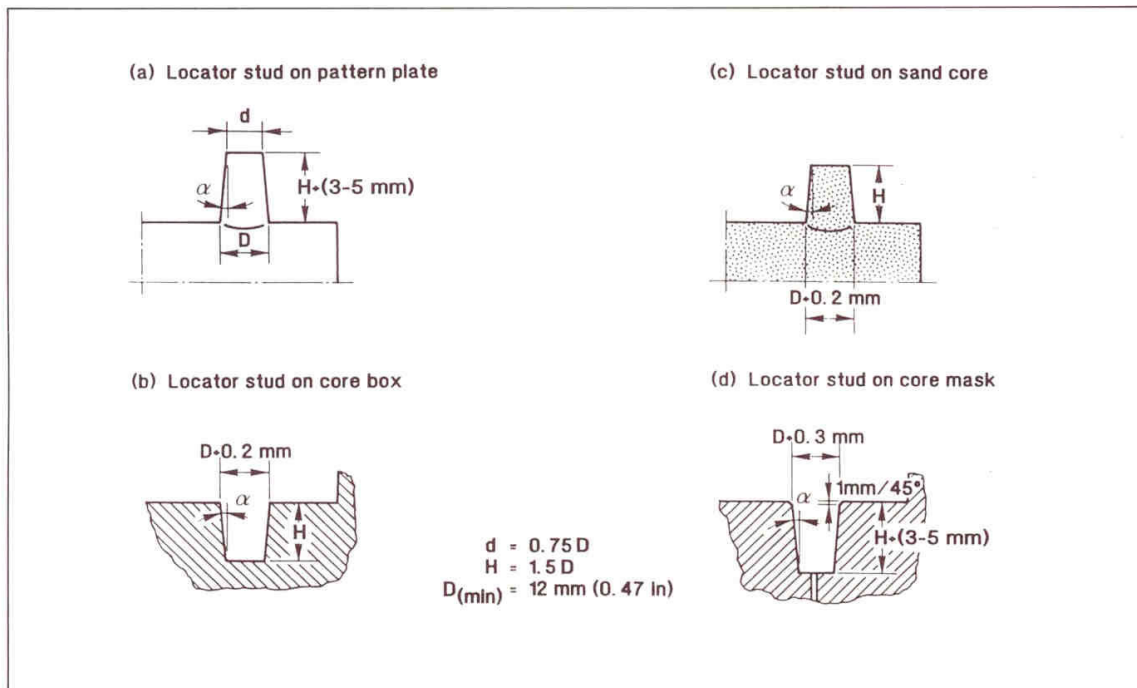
Dimensional tolerances for dowel locator studs used for small cores.
